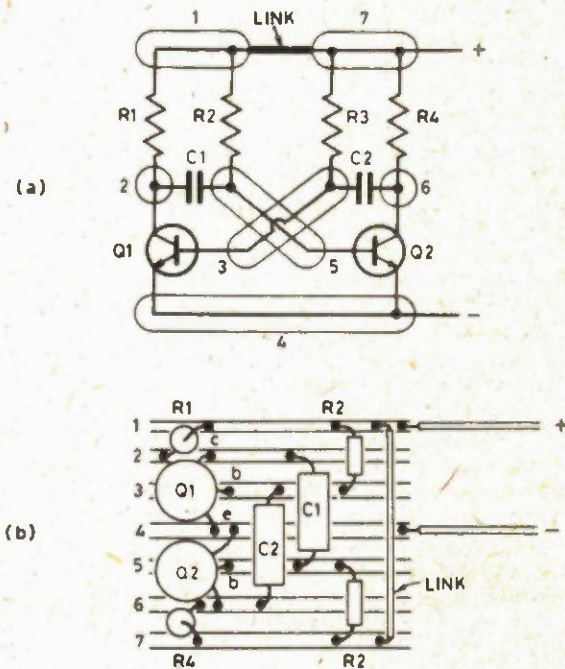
Mirror-image layouts (A) Marked-out circuit (B) Board layout.
